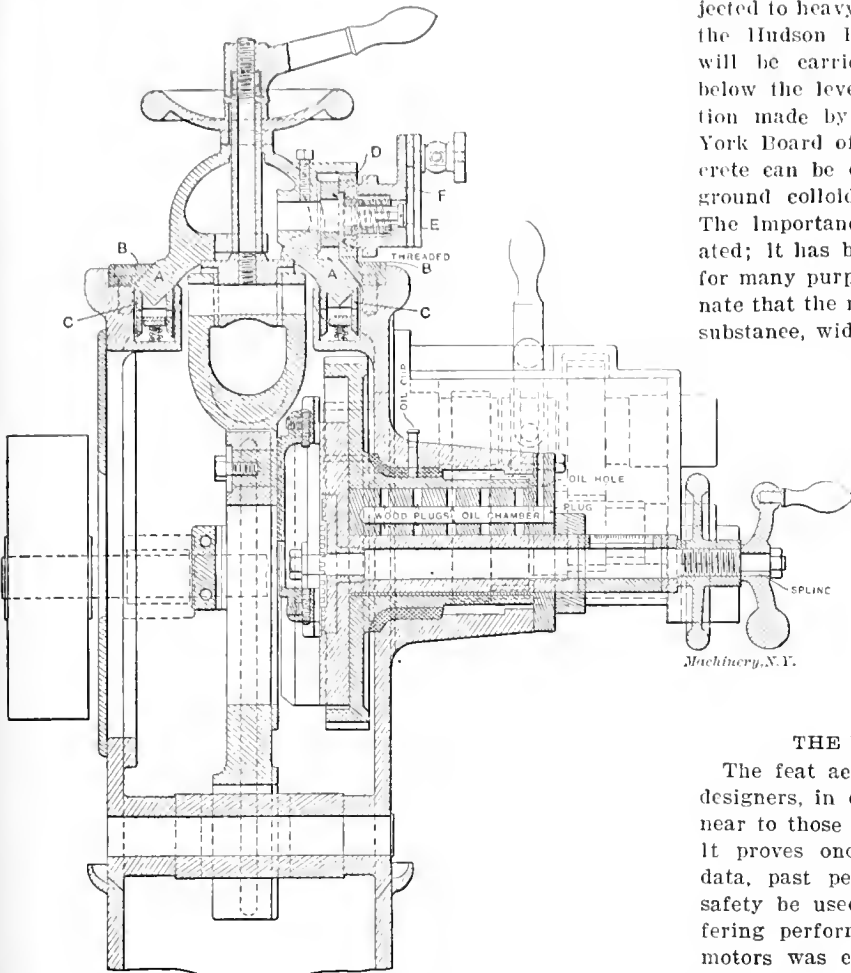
Section through Ram Driving Mechanism of Flather Shaper.
